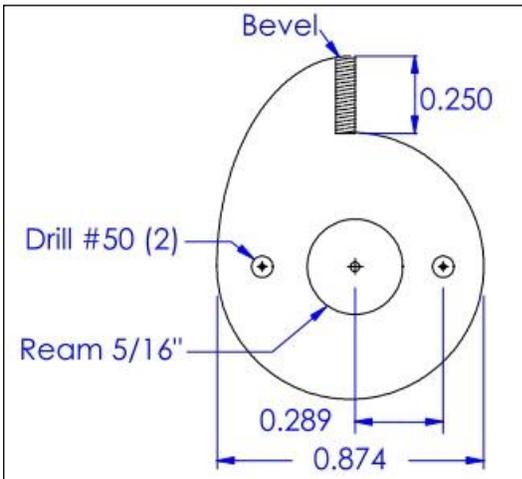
Construction drawing for the fusee stop. The stop is cut from 1/16" sheet brass.
